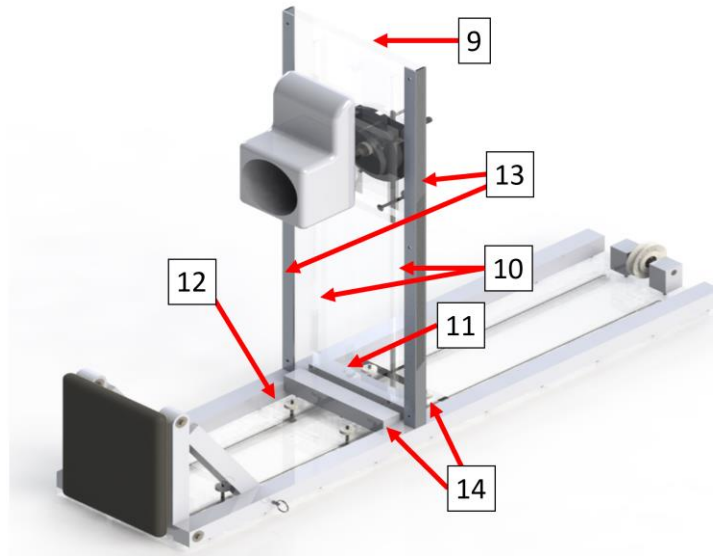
CAD Geometry of Vertical Plate Component in Bottom Base Assembly
